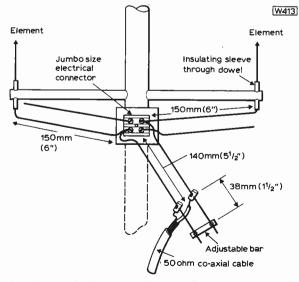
Details of the feed system for the end-fire beam shown in Fig. 8.
